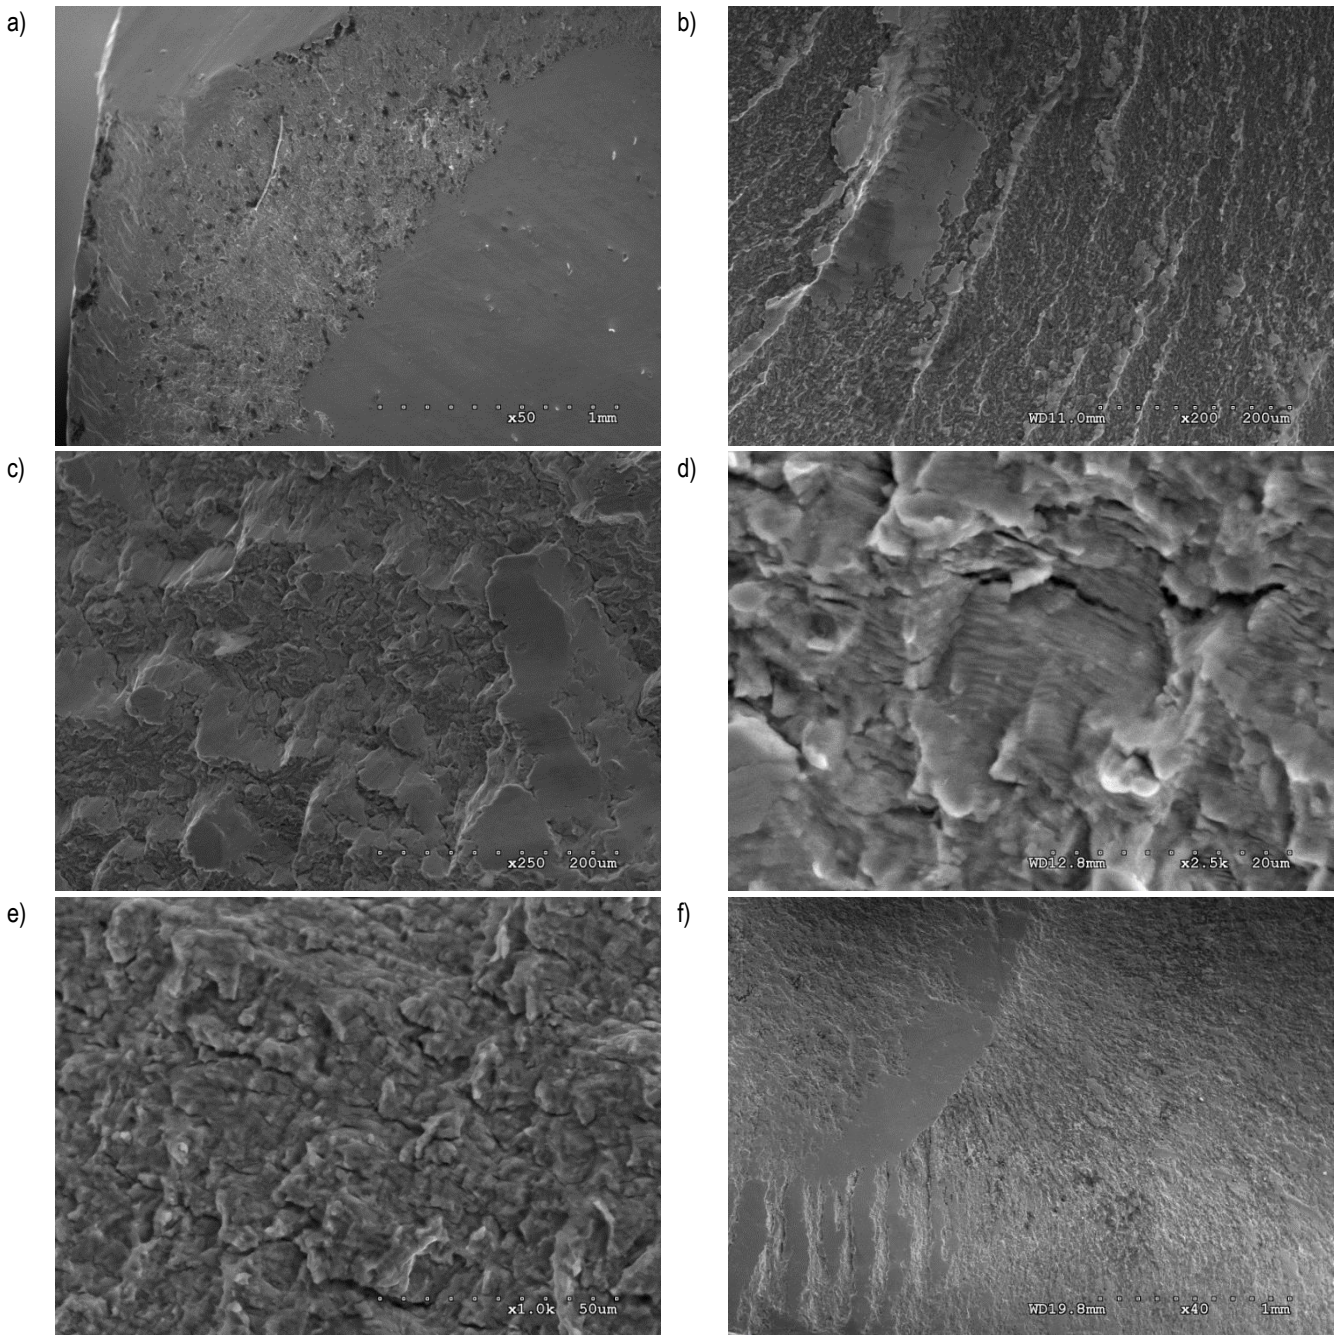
SEM images of the fracture surfaces of the tested steel failed by fatigue fracture demonstrating: (a) origin of the failure (b) beach marks area; (c) wear islands on the fracture surface ; (d) fatigue striation; (e) secondary cracks and fatigue tears; (f) final fracture area
